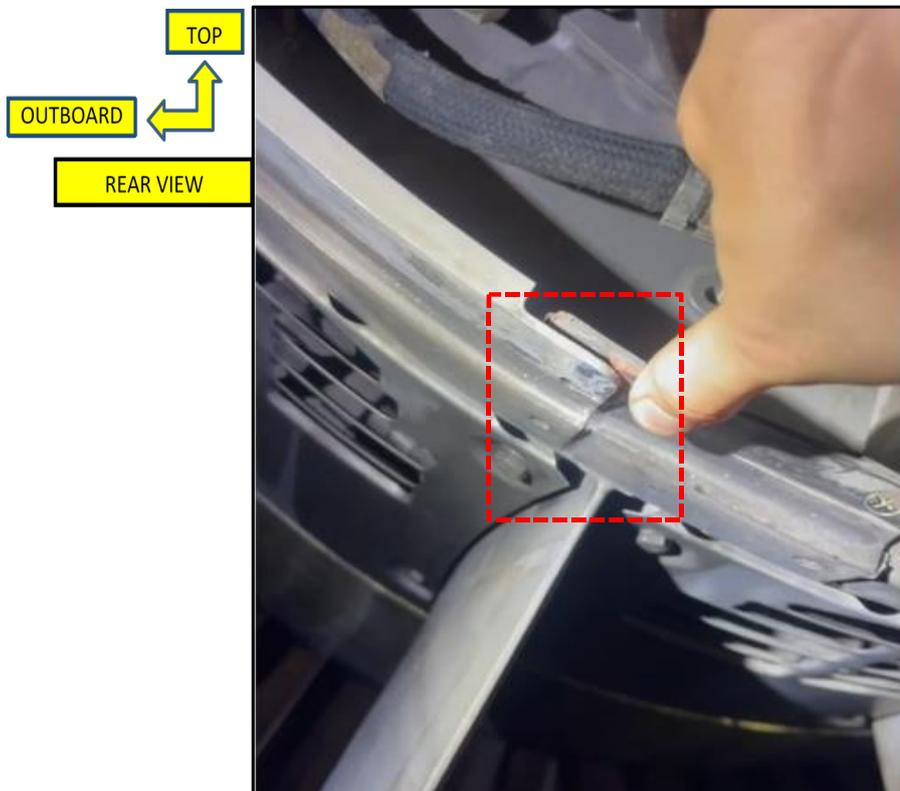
Engine No. 1 Flange Aft of VBV Rivet Pop-Out
